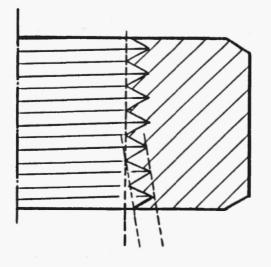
HALF SECTION OF A SPARLING DESIGN OF NUT
